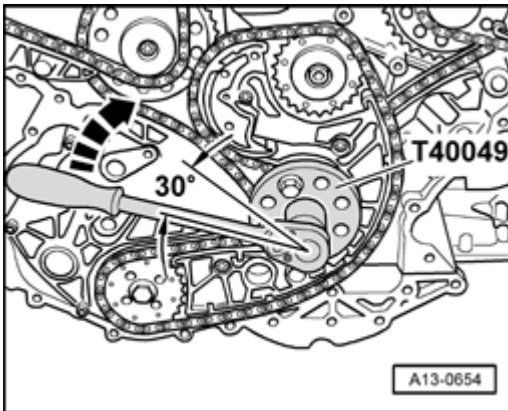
Using Key T40049 To Rotate Crankshaft In Opposite Direction Of Engine Rotation
